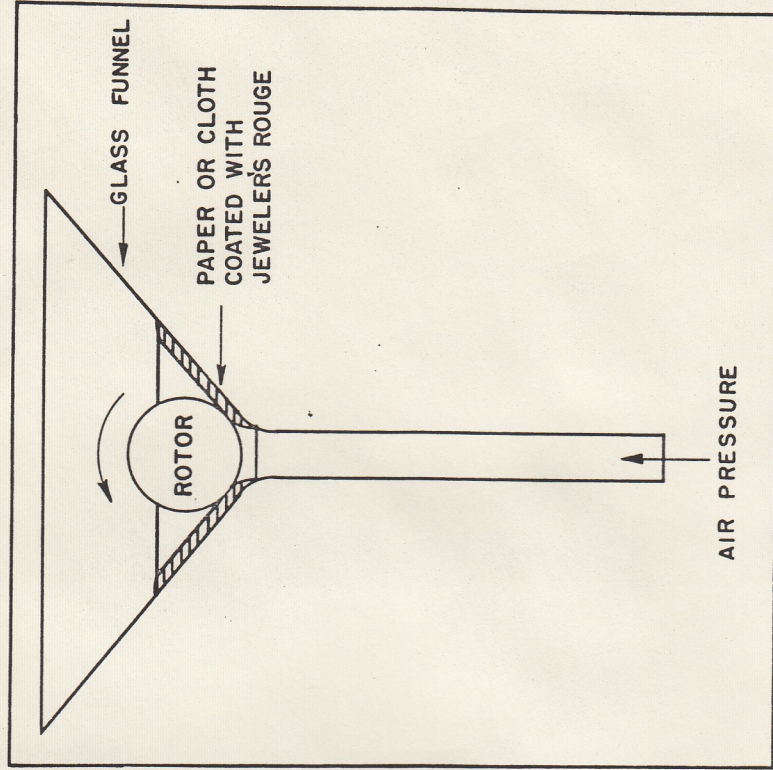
APPARATUS USED TO PRODUCE THE FINISHED ROTOR
